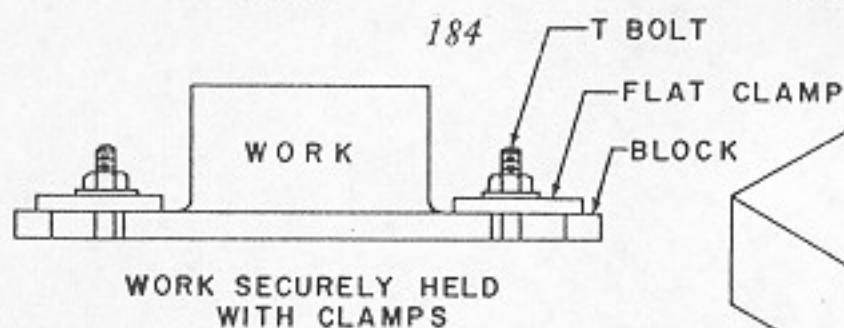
When necessary, clamp the work to the milling machine table with T bolts, clamps, and blocks.
